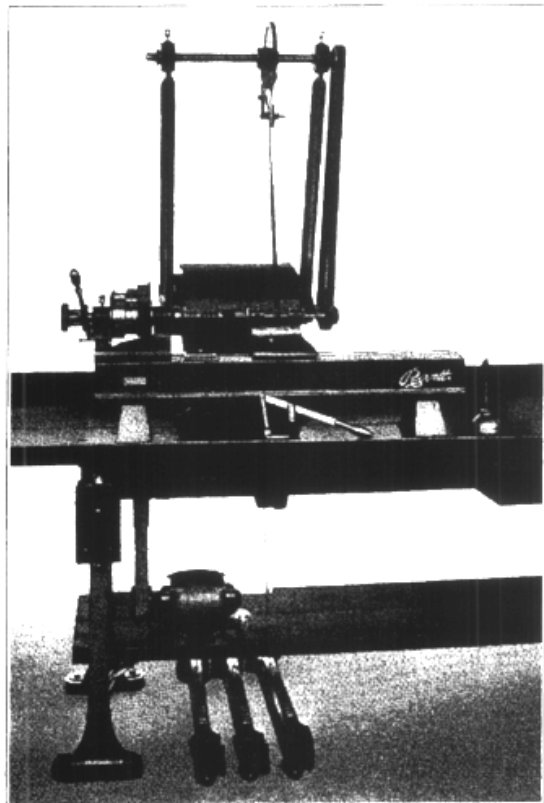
Rivett Series 505 lathe on bench with Horizontal Safety Drive Countershaft, Grinding Countershaft Attachment, ball-bearing, and Latch Treadles. Weight of this grinding attachment countershaft 68 lbs.
